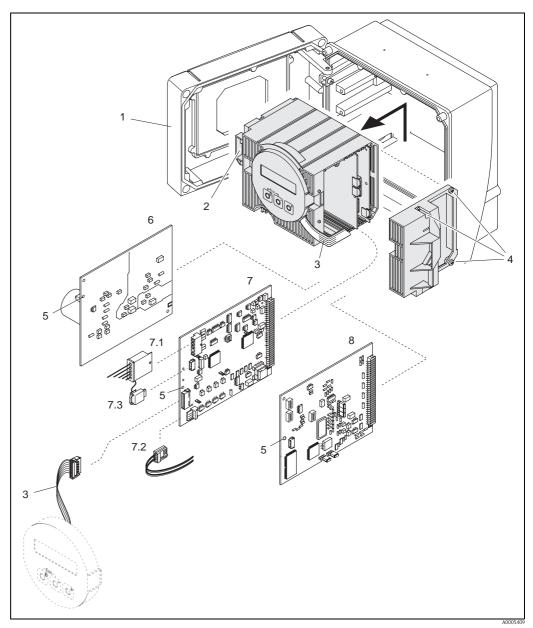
Wall-mount housing: removing and installing printed circuit boards
